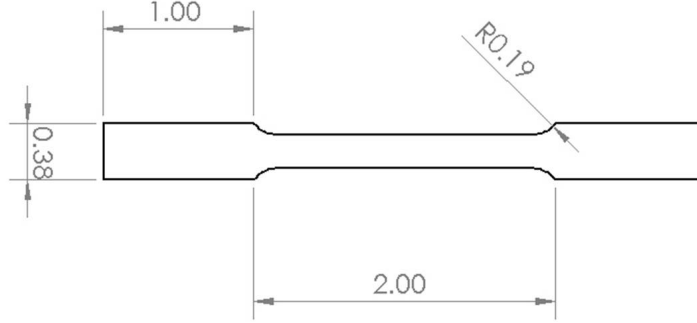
Schematic test specimen for tensile testing (dimensions in inches).
